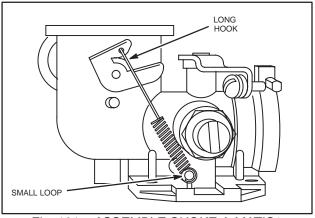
ASSEMBLE CHOKE-A-MATIC® SPRING
